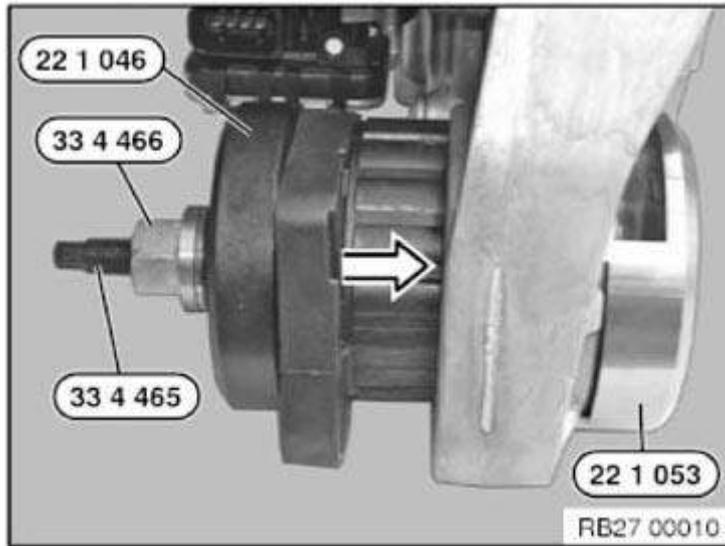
Installing Rubber Mount Using Special Tools (22 1 046)
